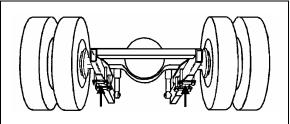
JACKING POINTS ON DRIVE AXLE
